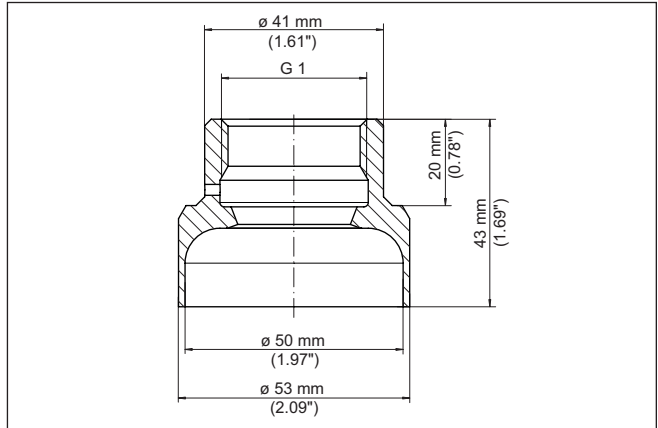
Dimensions direct welded socket for pipe mounting G1 - Cone sealing
